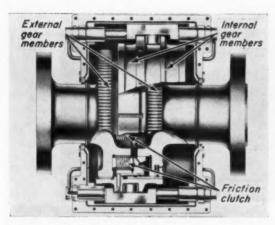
A multiple-disc friction clutch is used to synchronize driving and driven gear members in this positivecontact clutch unit so they can be engaged at high speed.
